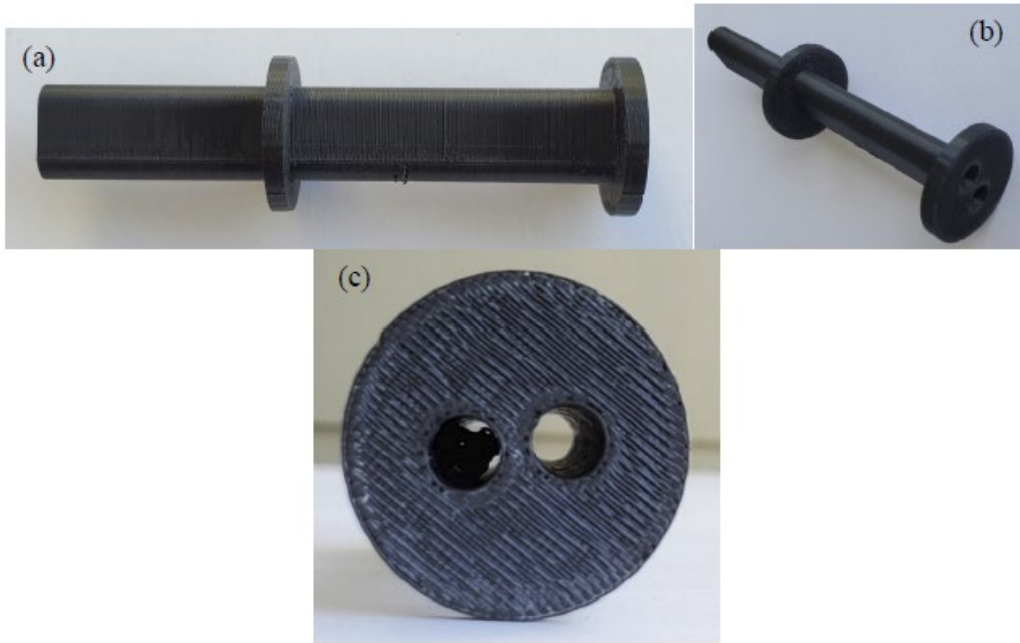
3D printed sensor holder: (a) side view, (b) other view of (a), and (c) front view-before drilled, left side obstructed hole.
